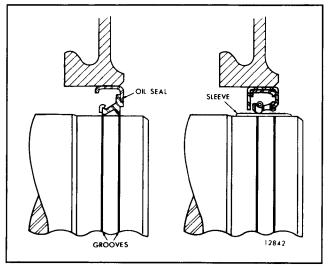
Use of Rear Oil Seal Sleeve on Grooved Crankshaft (In-line and 6V-53 Engines)
